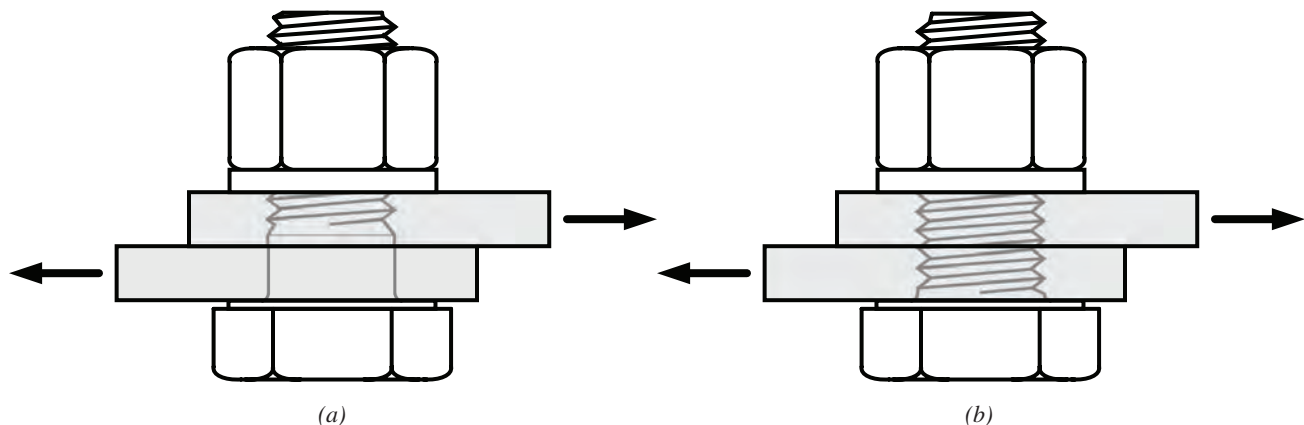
Illustration of a joint with 7/8-in.-9x2-in. bolts (a) as might be expected by the engineer of record and (b) as provided.
